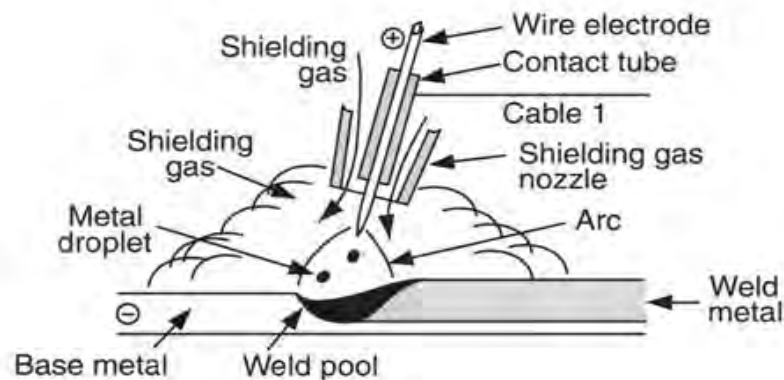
Schematic Diagram GMAW welding process (Miller, 2012)
